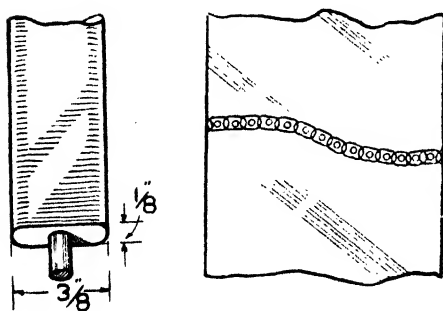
PUNCH-TYPE NIBBLER FOR CUTTING METAL FROM 16- TO 10-GAUGE THICKNESS
